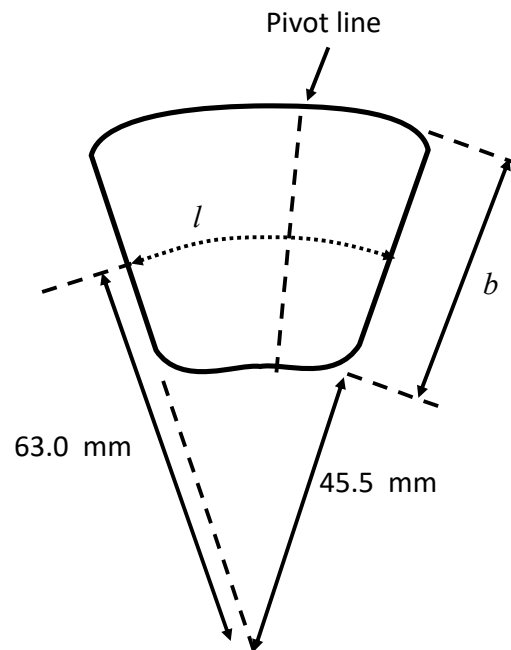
Dimensions of a pad for the ‘ESDU’ bearing.
